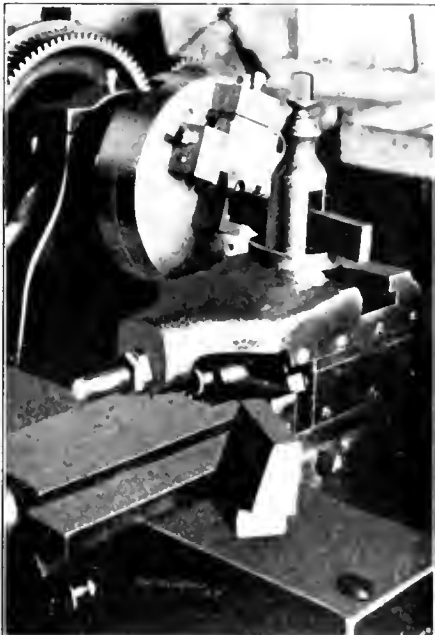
Boring, Threading and Facing Jaws in a Lathe
